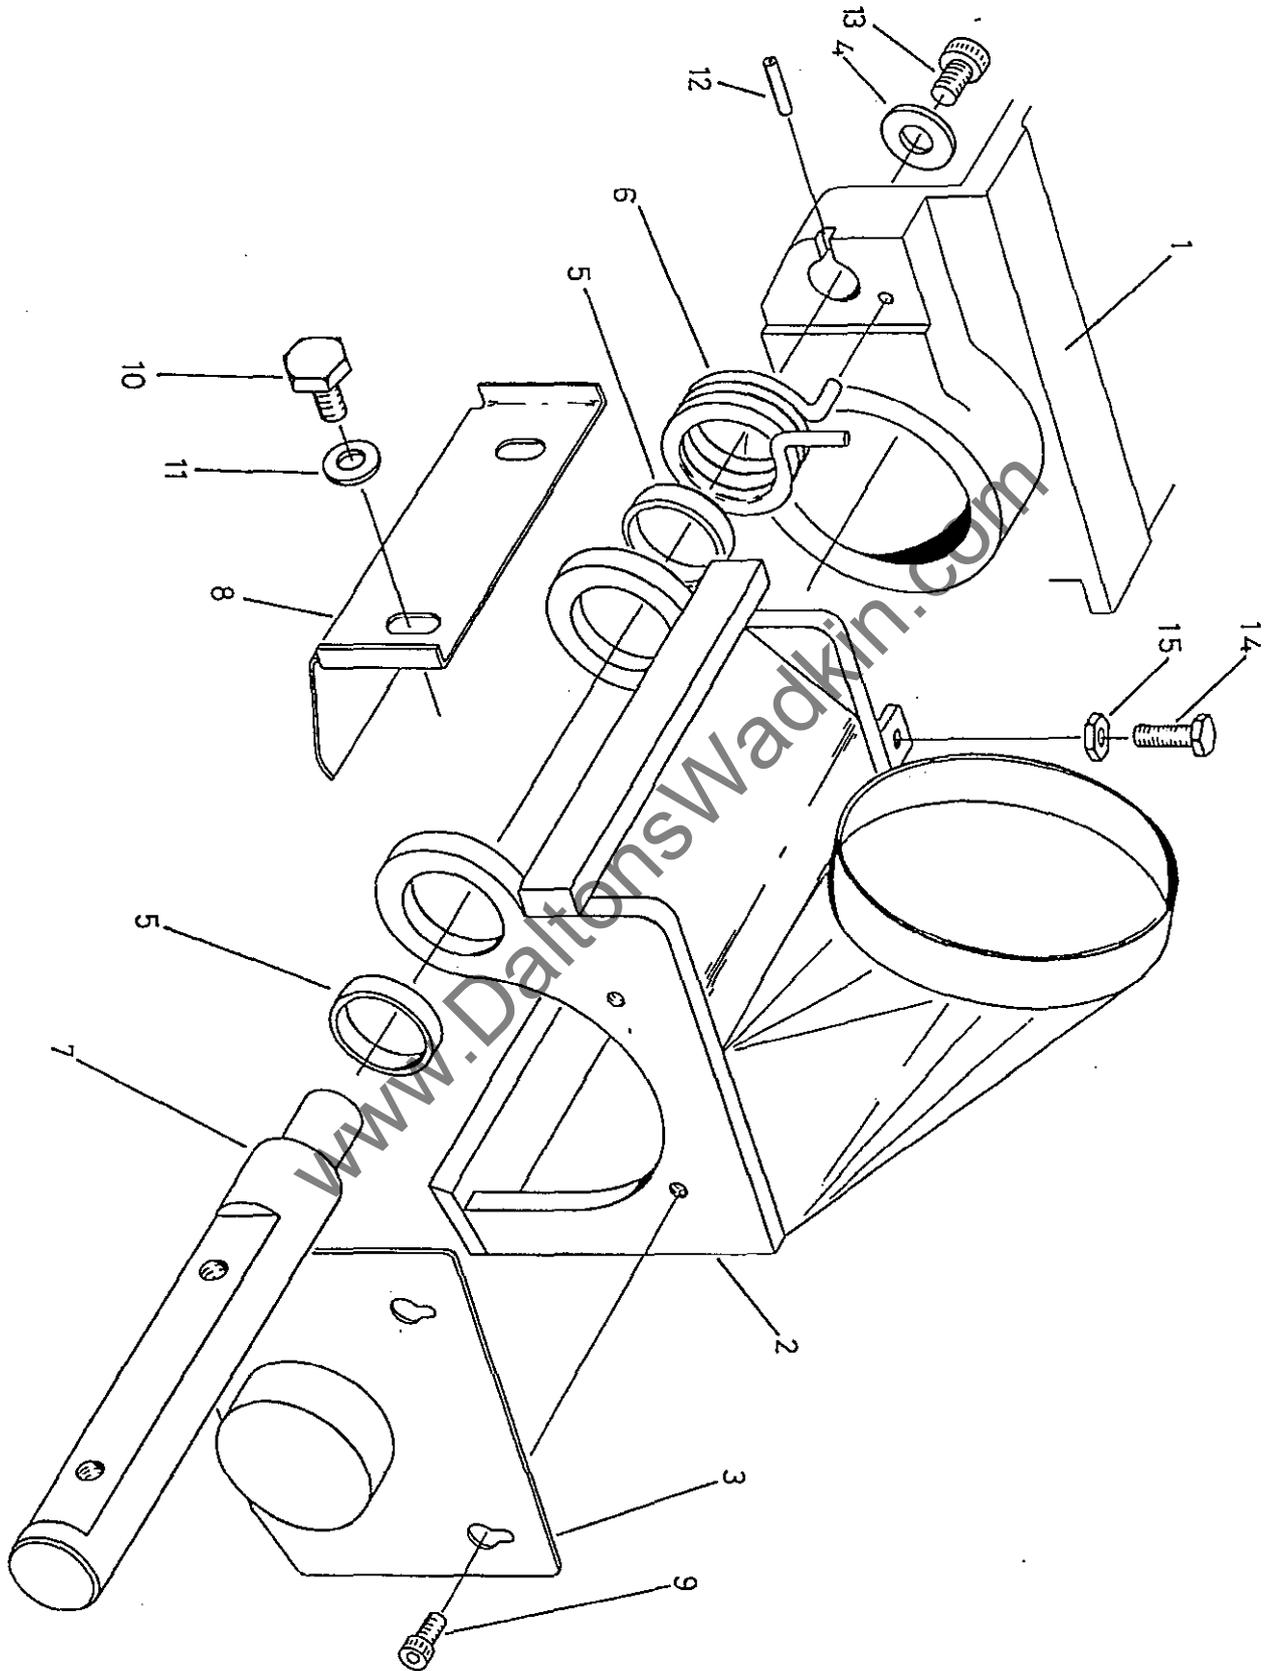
TOP HEAD HOOD AND CHIPBREAKER - 180
